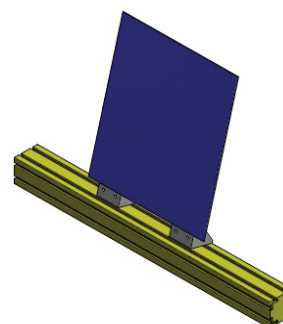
3D CAD – Axonometric view of sample holder plate.
